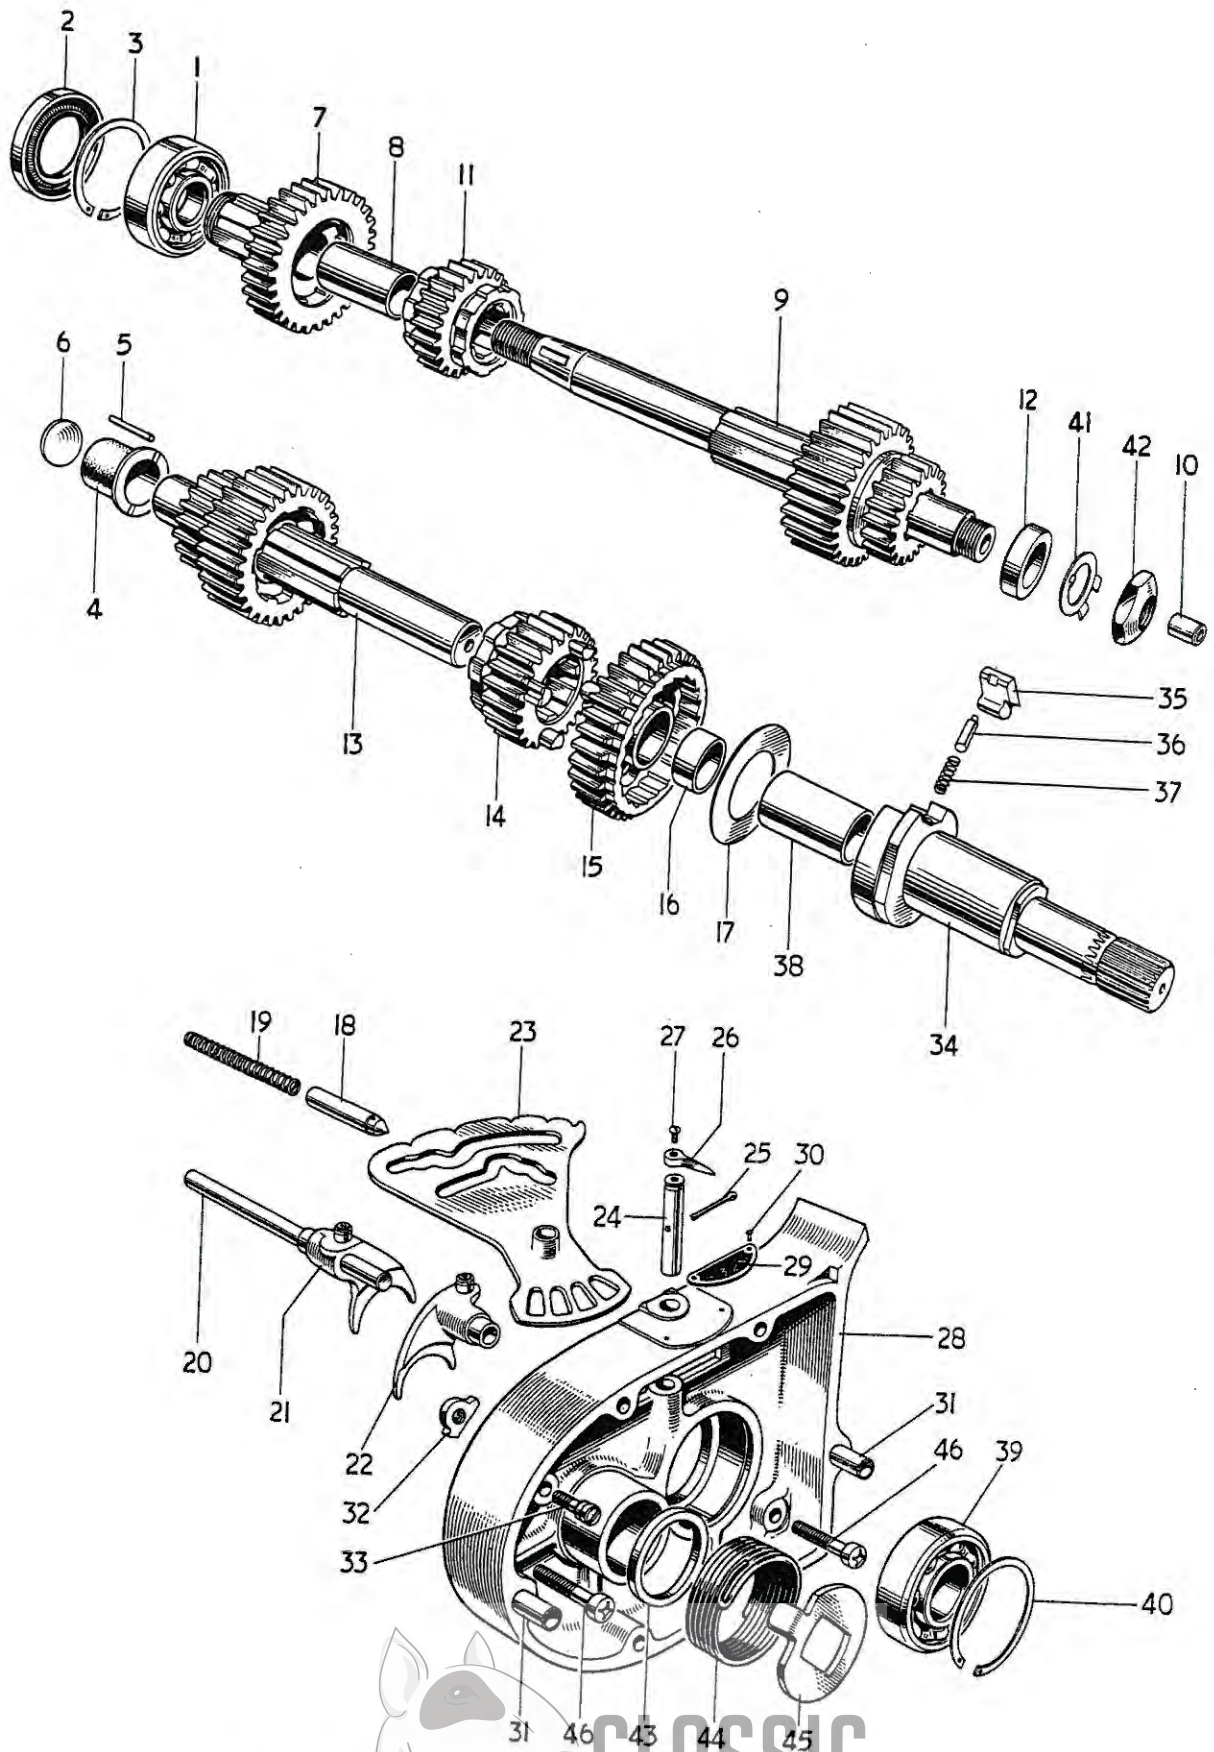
GEARBOX SHAFTS, BEARINGS AND INNER COVER.
